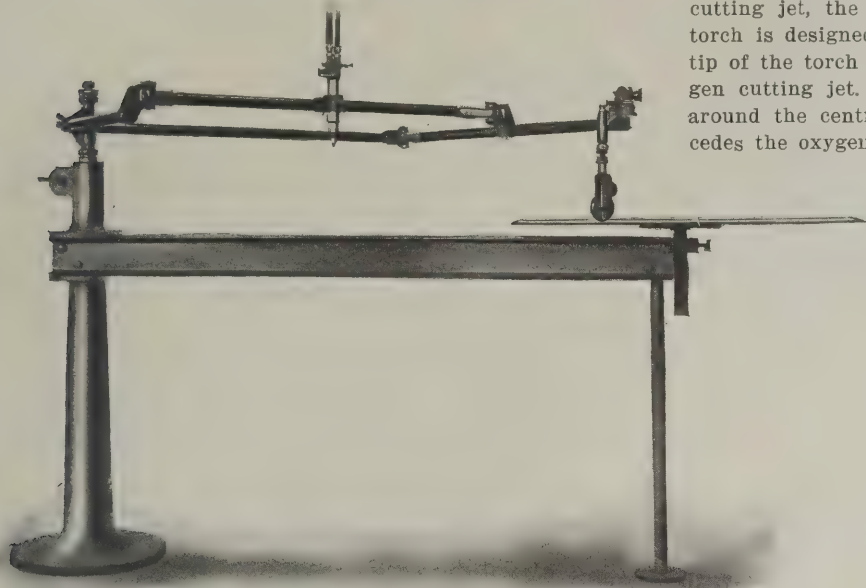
The Oxygraph—A Machine for Cutting Steel by the Oxy-acetylene Flame
